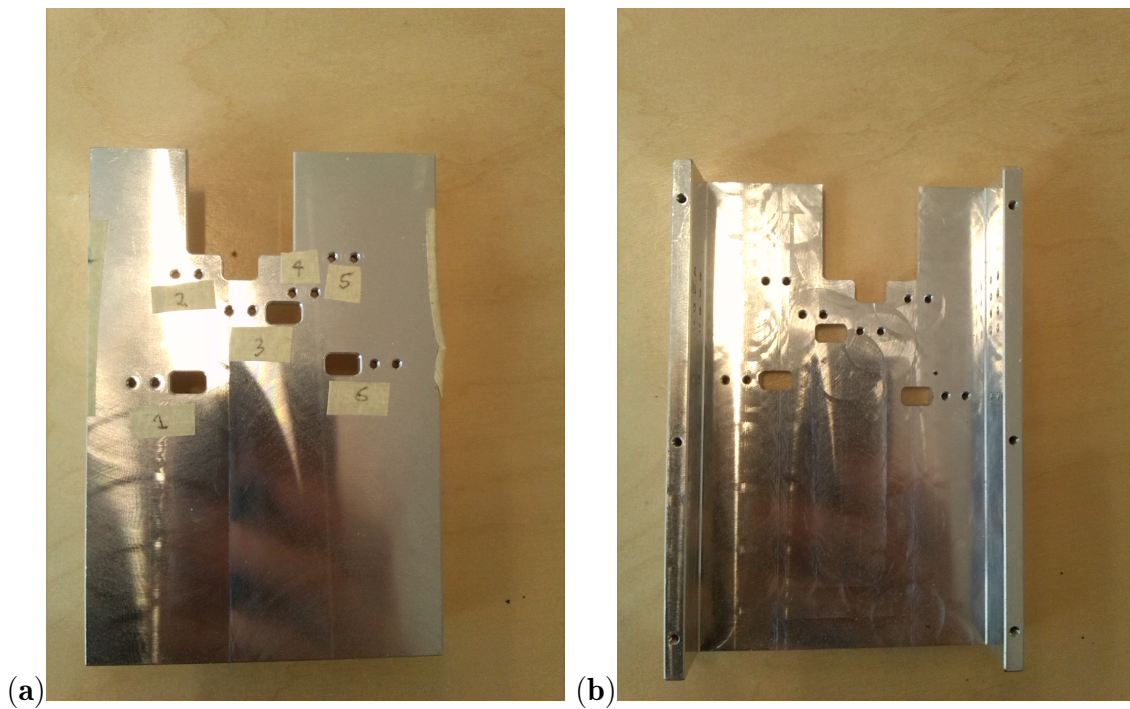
(a) Outside view of the lower part of the alignment tool (b) Inside view of the lower part of the alignment tool
